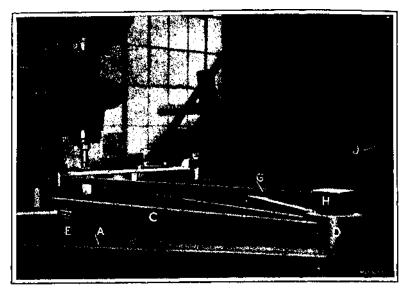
Radial Milling Fixture used for Different Operations on Sight-bar
